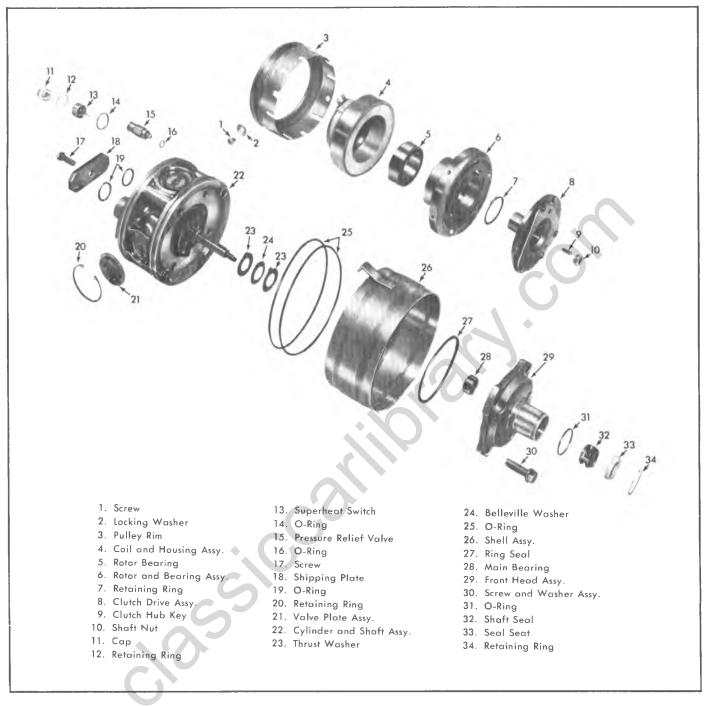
Radial Four Cylinder Compressor-Exploded View
